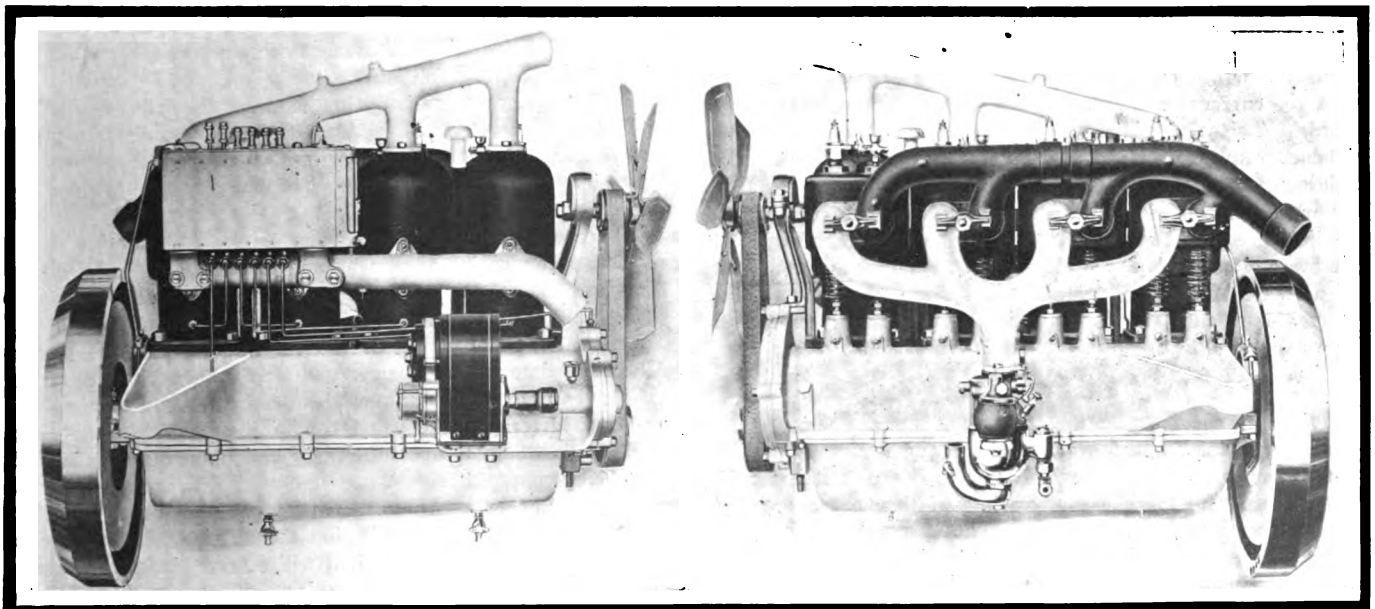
View of both sides of the model 69 Overland motor, showing magneto, carbureter and mechanical oiler
